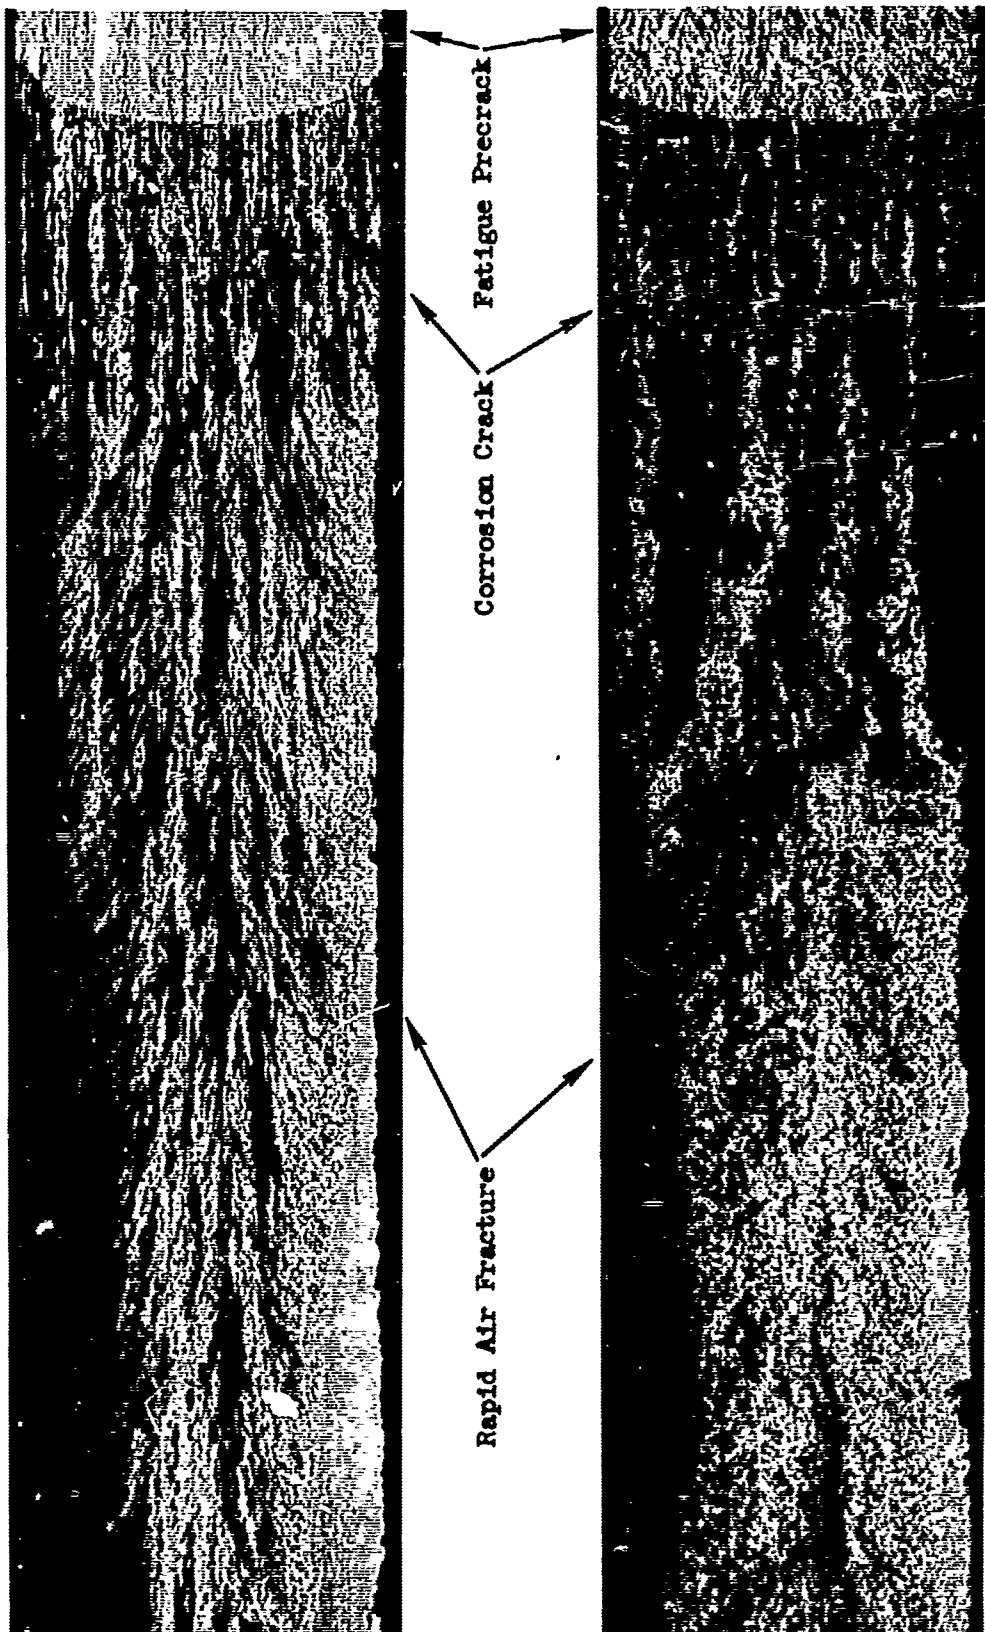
Fracture Appearance of Ti-8Al-1Mo-1V (Top) and Ti-5Al-2.5Sn (Bottom) Edge Precracked Specimens
